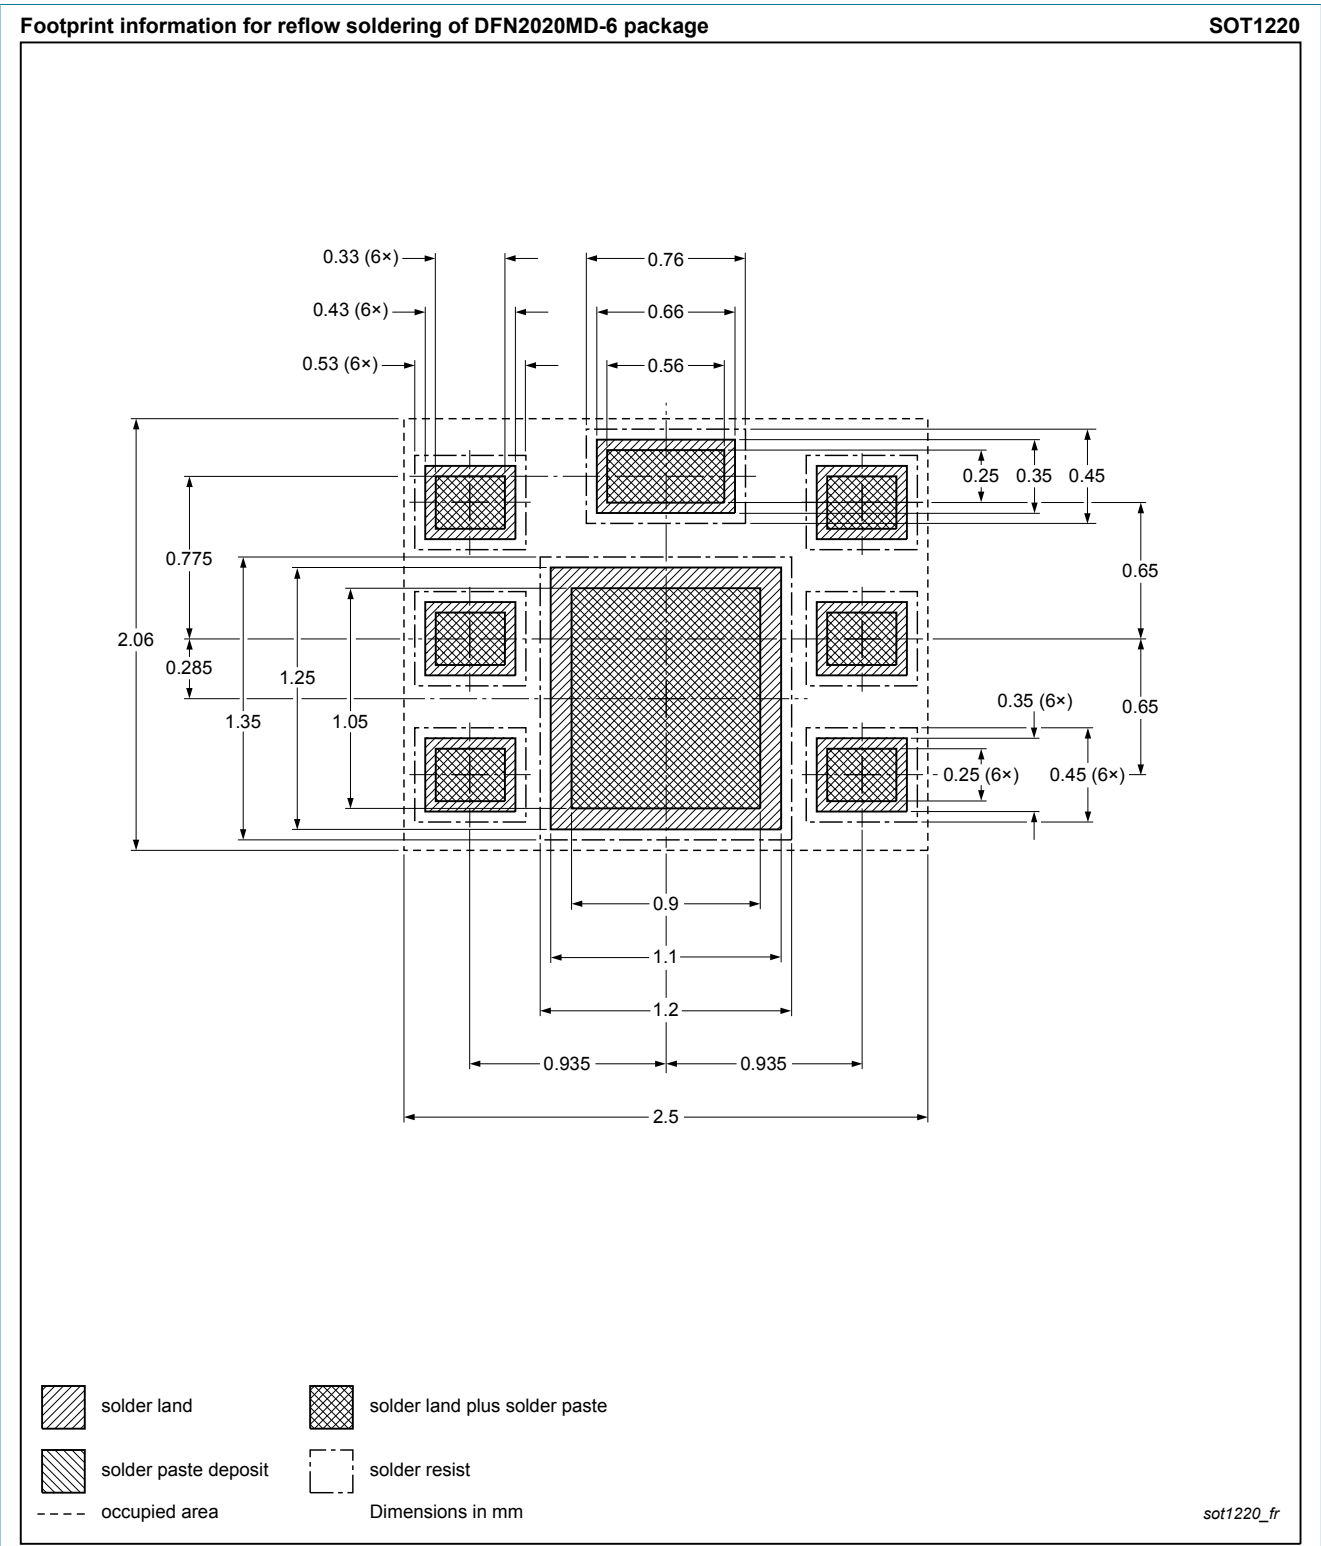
Reflow soldering footprint for SOT1220 (DFN2020MD-6)
